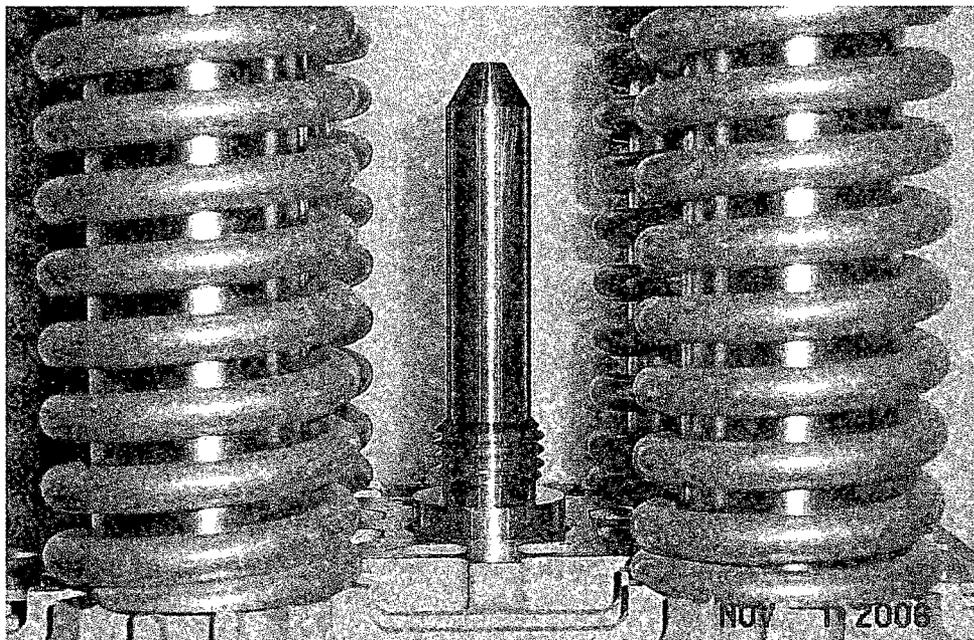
Upper end fitting assembly – instrument housing, flow plate, and hold down springs
